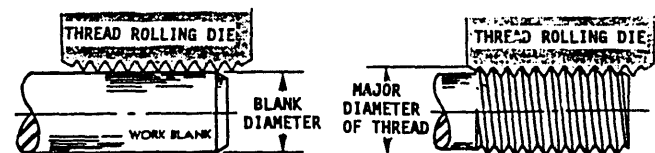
Illustration of Roll Forming of a Metal Blank by the In-Feed Process, Courtesy of Reed Rolled Thread Die Co.
